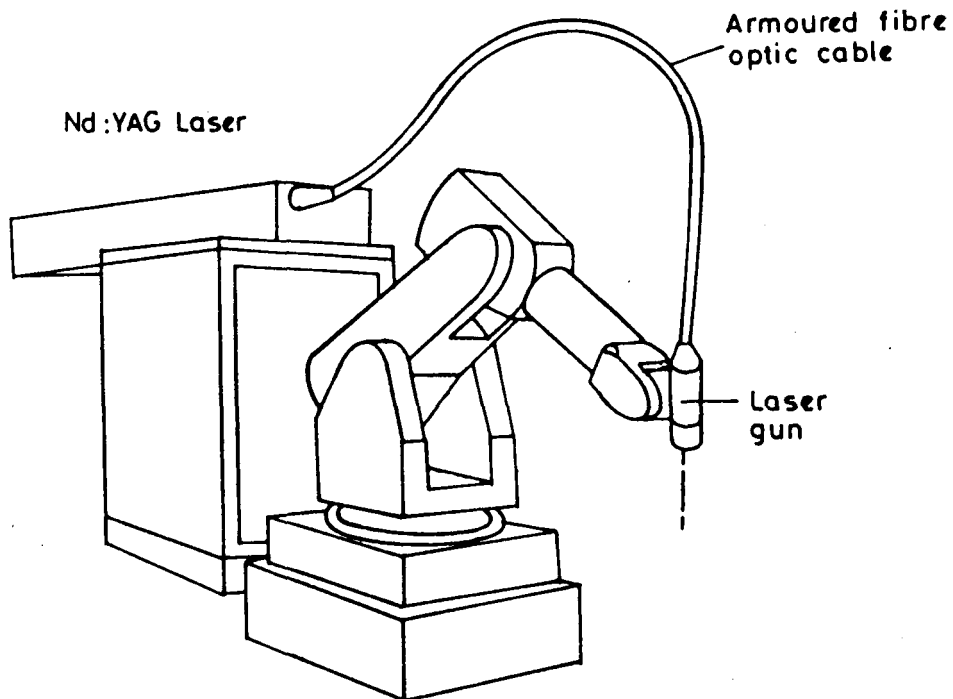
Use of Fibre Optic for transmitting an Nd : YAG Laser Beam to the Robot Welding Gun
